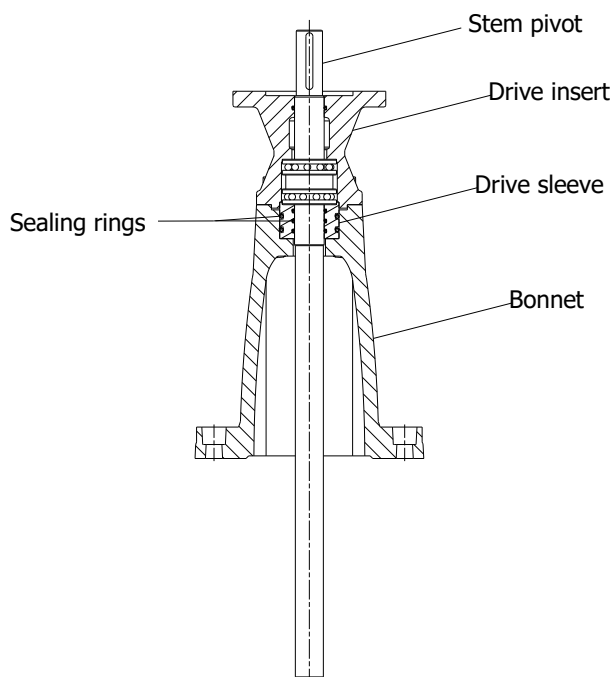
Wedge- gate valves adjusted to the electromechanical drive and worm gearing according to ISO 5210.
